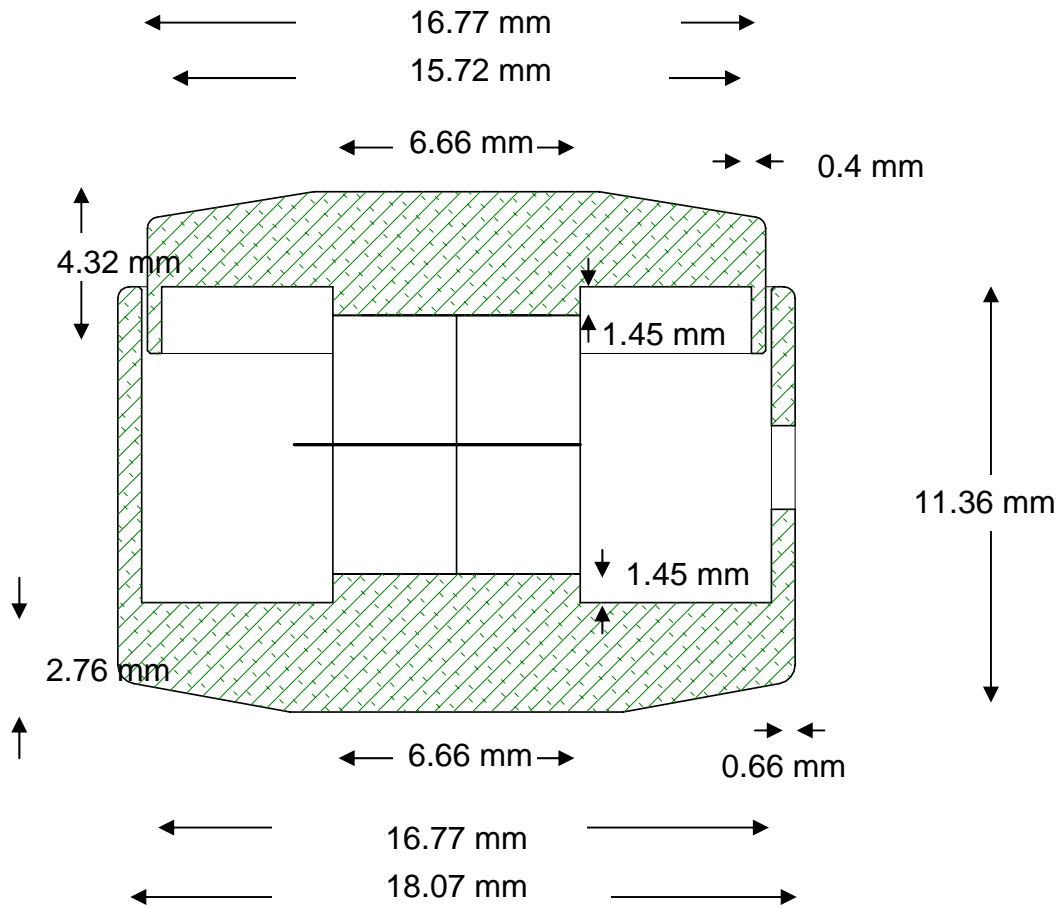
Dimensions of the Aluminum parts of MiniCan-7
